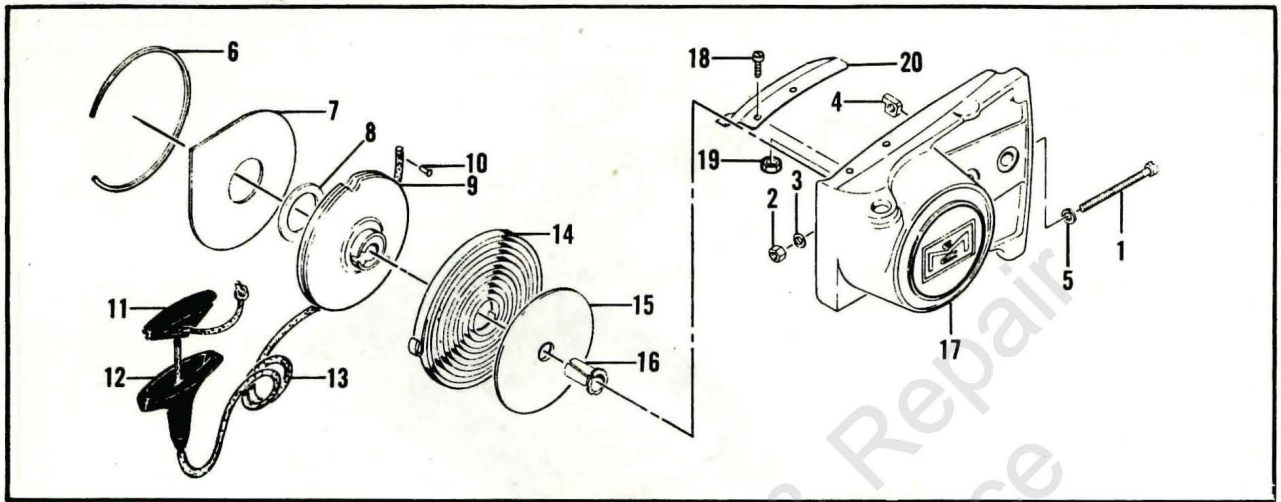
CLUTCH GUARD AND STARTER ASSEMBLY
